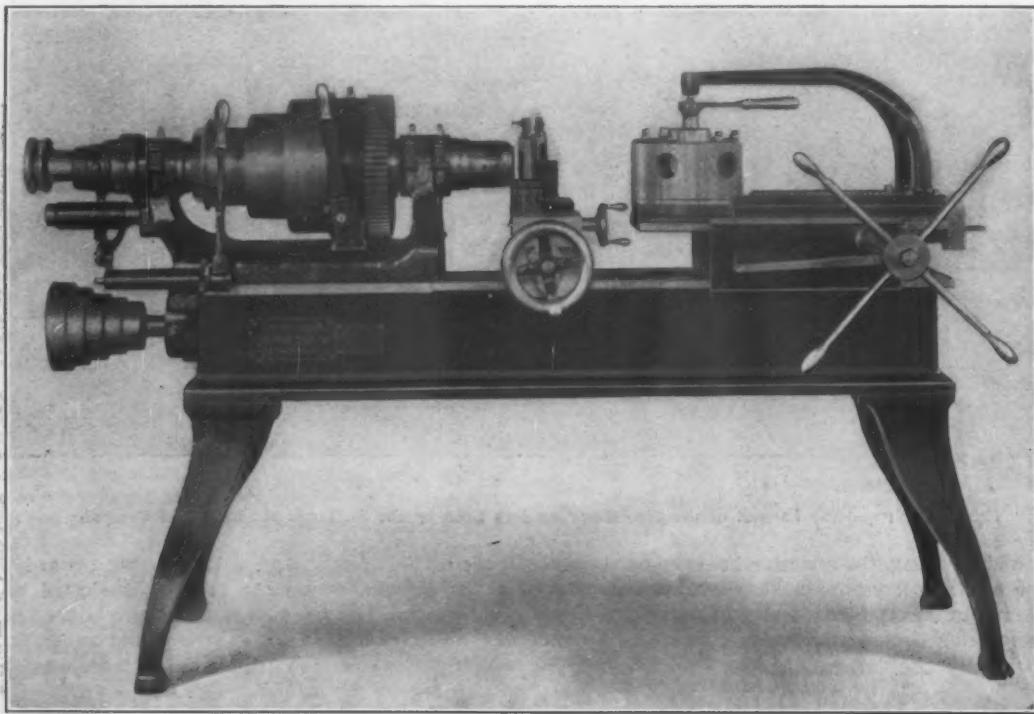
The New Turret Lathe Built by the Meriden Machine Tool Company, Meriden, Conn.
